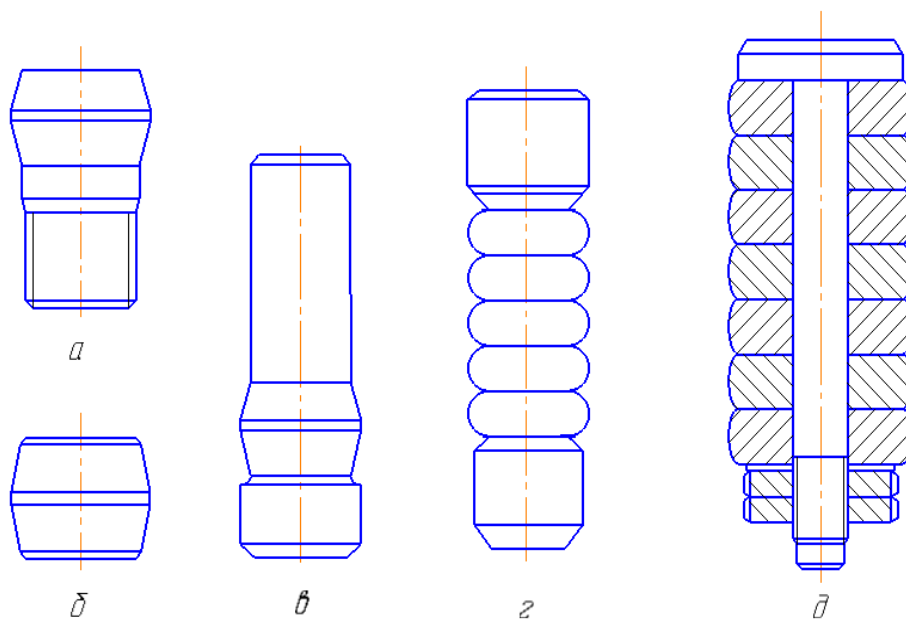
Kinds of burnishing tools: a - single-tooth with a shank for work on the broaching machine; b - single-tooth without shank for working on the press;
